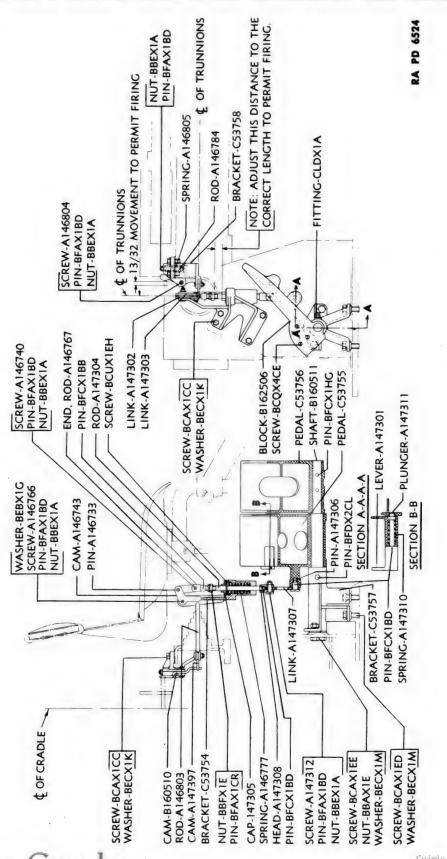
Foot Firing Mechanism Assembly, M3 and M3E1 Carriages
